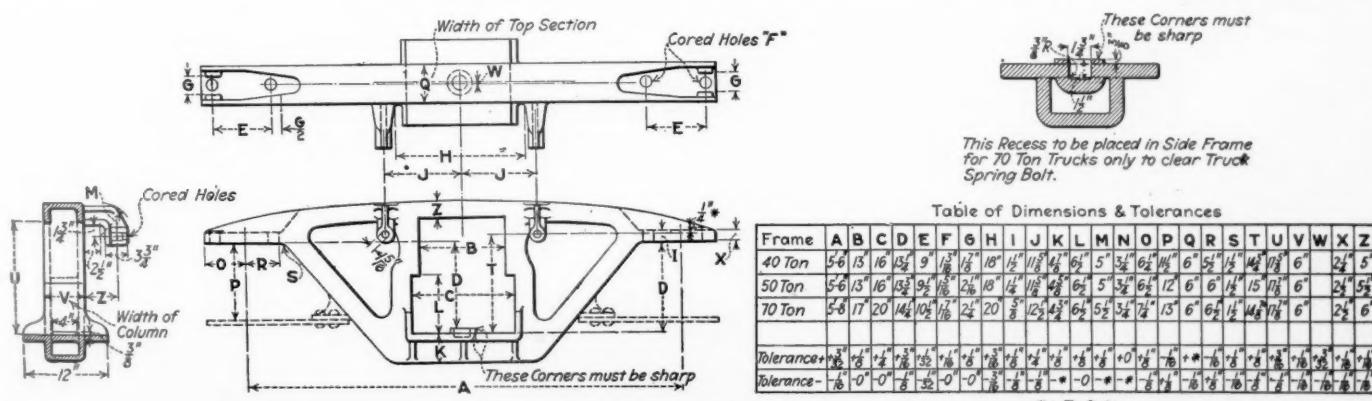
Limiting Dimensions for the Cast Steel Truck Side Frames
